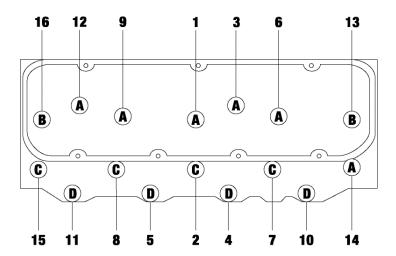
Cylinder Head Bolt Torque Sequence and Bolt Boss Height Chart Torque Bolts to 70 ft.-lbs In The Sequence Shown
